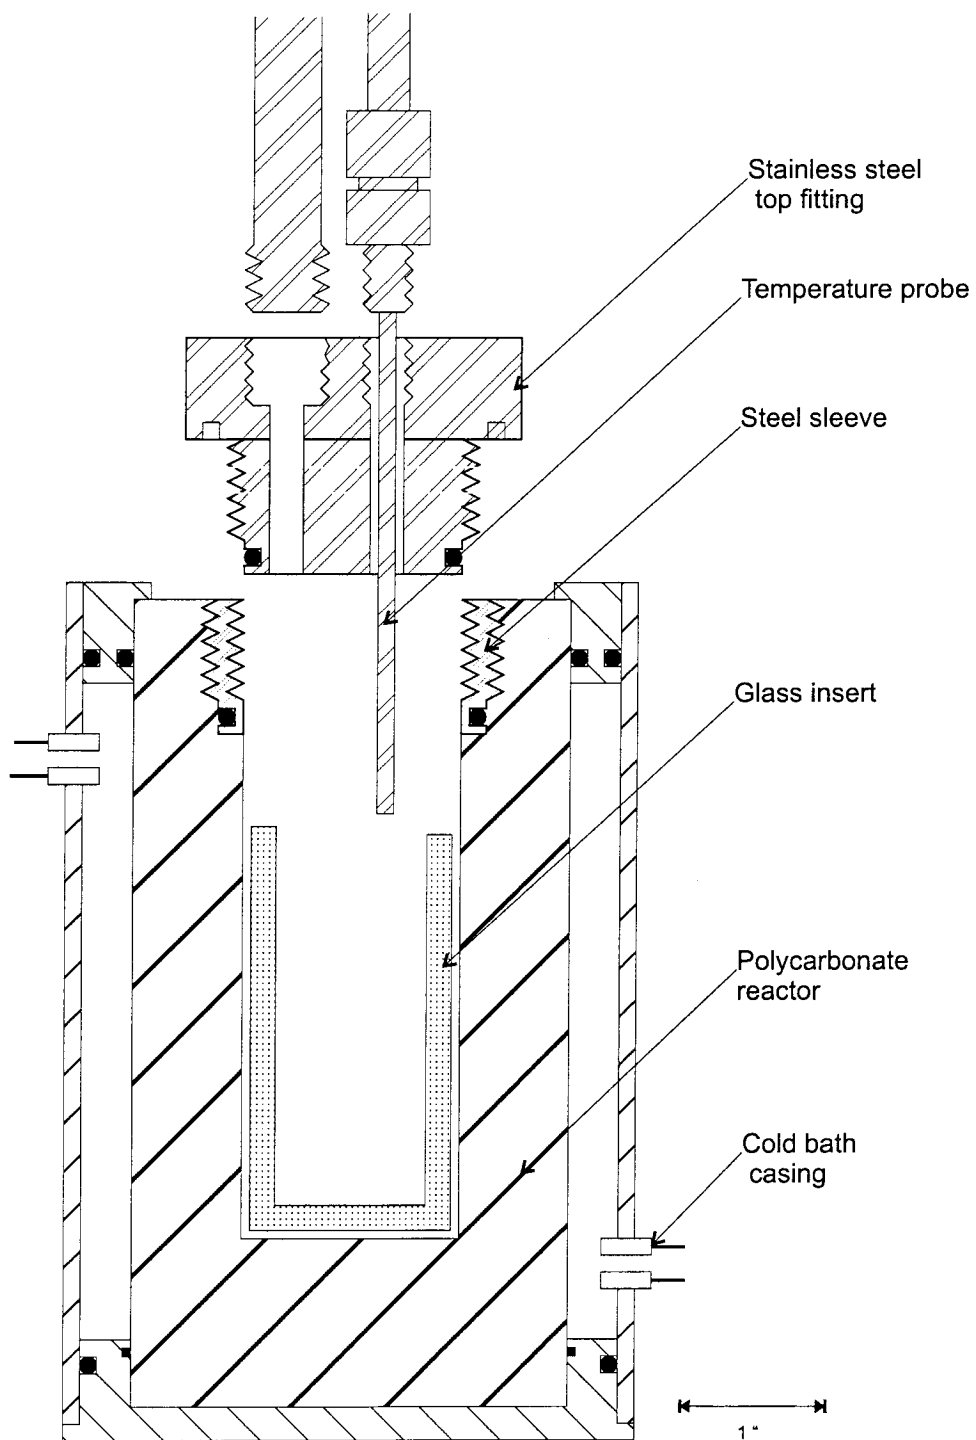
The final, complete reactor, showing glass liner, polycarbonate chamber, steel insert, temperature probe and gas inlet piping.
